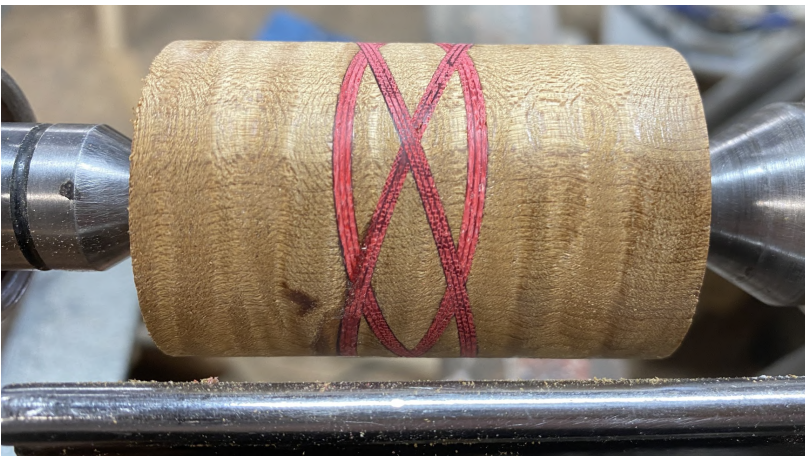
The blank is turned to a cylinder between centers. The ends are drilled with a 60° centre drill before mounting on the lathe.
